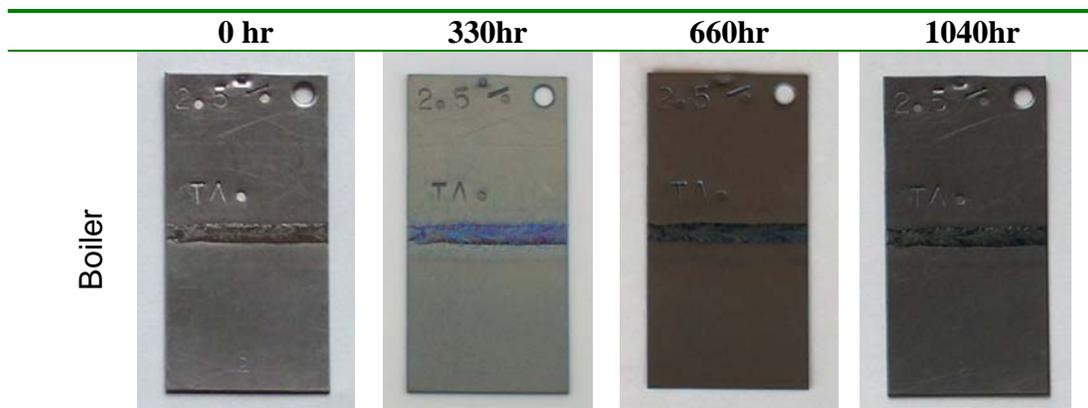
Ta-10W immersion corrosion coupon with an e-beam weld.
